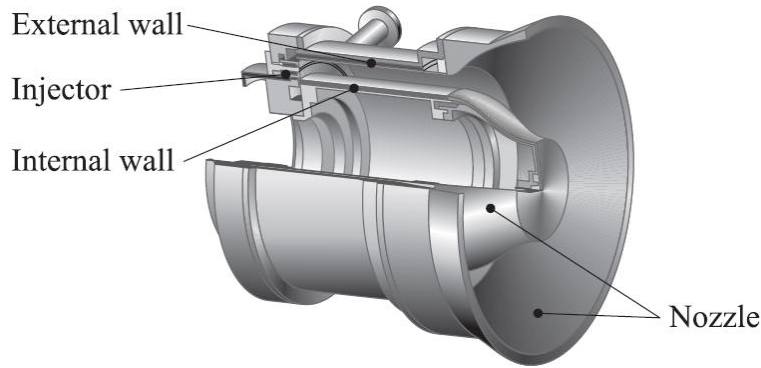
Layout of a CDWE showing the direct attachment of the nozzle [12]
